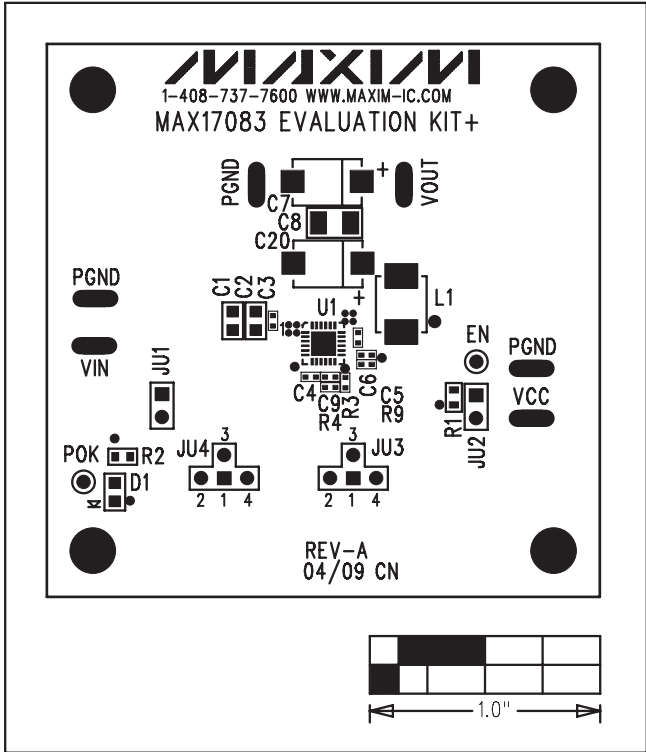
MAX17083 EV Kit Component Placement Guide—Component Side
